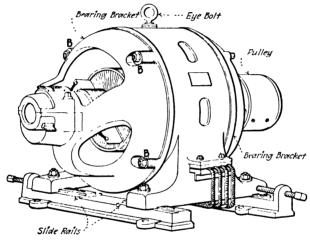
Single-phase motor of the bearing bracket type. The four bolts B which hold each bearing bracket can be unloosened, the brackets rotated through 90 or 180 deg. and then the brackets can be fastened in the new position (Wagner Electric Mfg. Co., St. Louis, Mo.)
